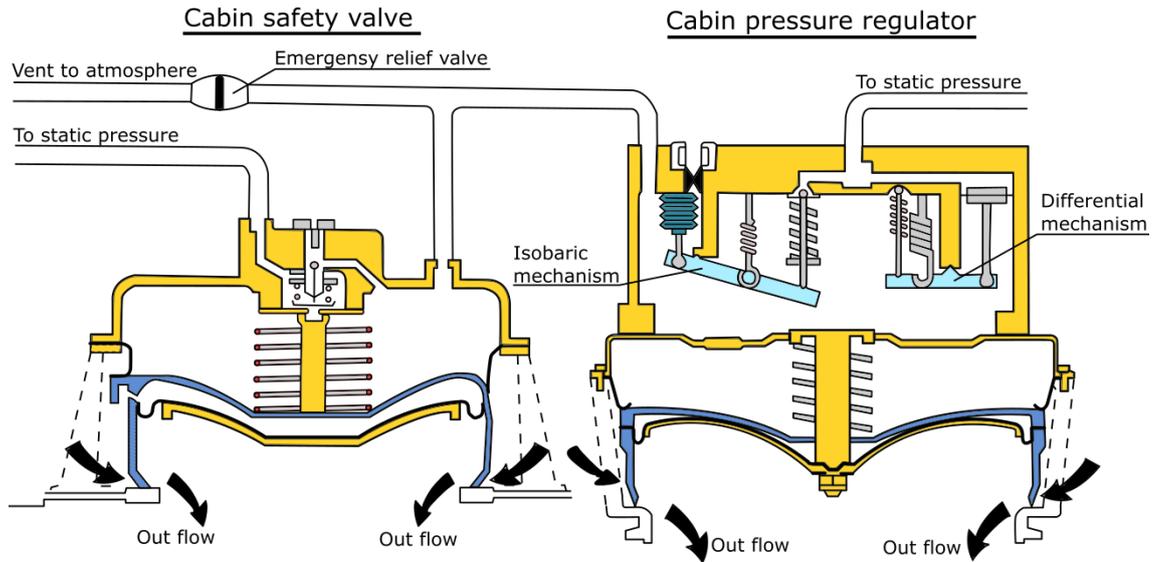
Section view of cabin pressure regulator and cabin safety valve (valves shown in closed position)
